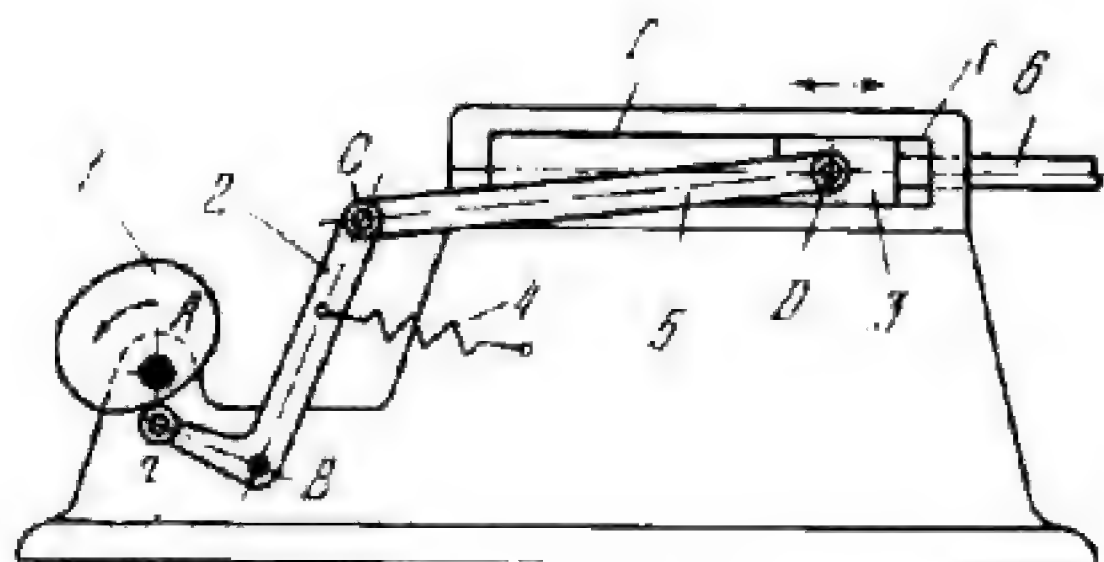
rotates about fixed axis A. Follower 2 oscillates about fixed axis B and carries roller a which rolls along the working surface of cam 1. Link 5 is connected by turning pairs C and D to follower 2 and to slide 3 which reciprocates in fixed guides f-f. Rigidly attached to slide 3 is ram 6 of the pressing device. Roller a is held in contact with cam 1 by spring 4.
